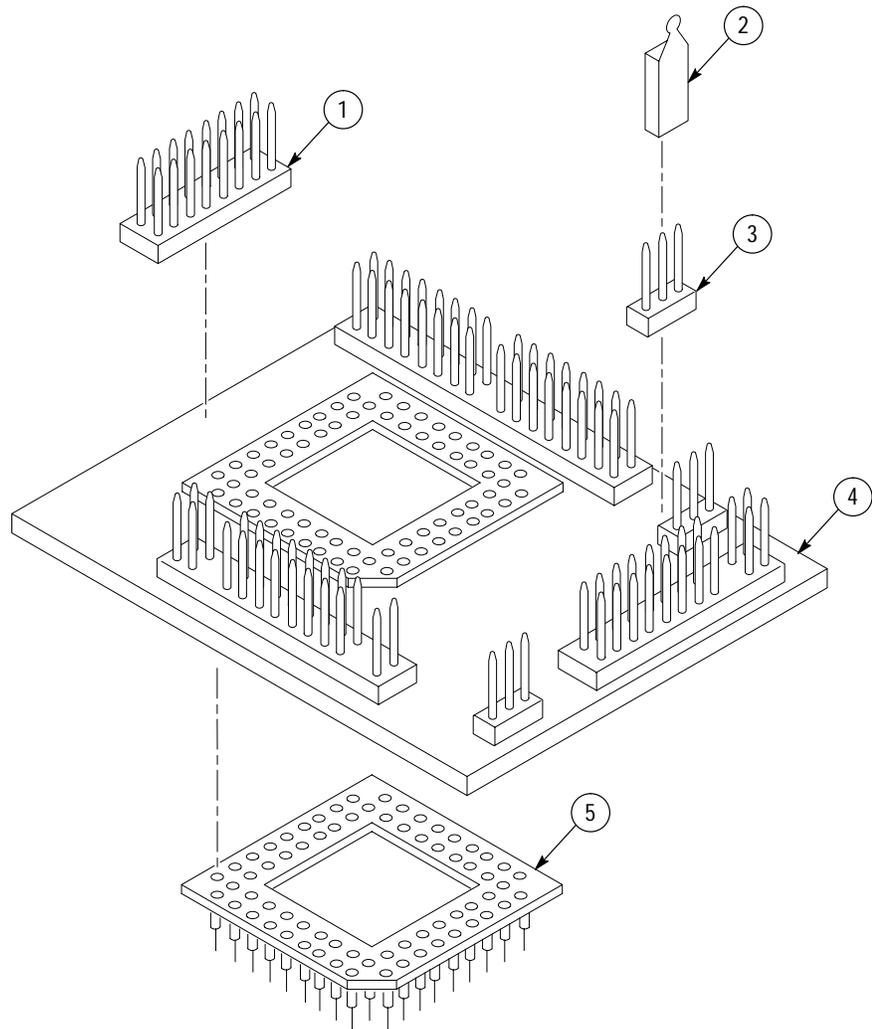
8096, 80196 and 80C196 PGA probe adapter exploded view
